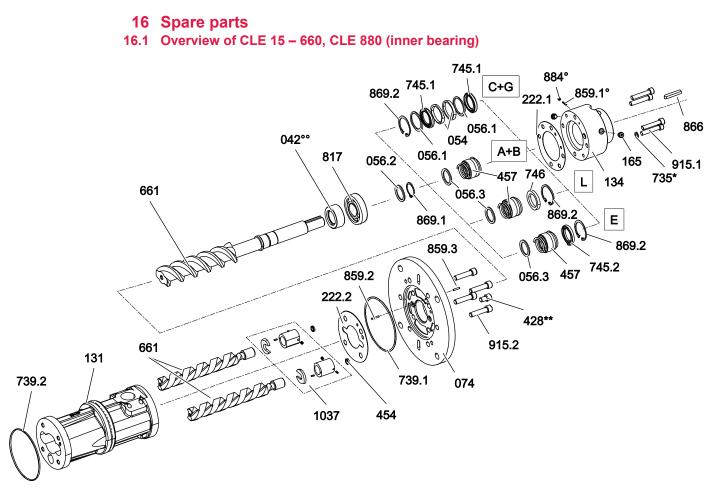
Spare parts CLE 15 - 660, CLE 880
